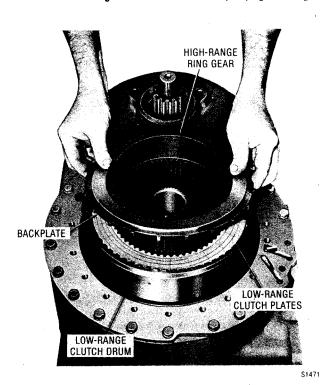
Installing low-range clutch backplate (TRT-1)
